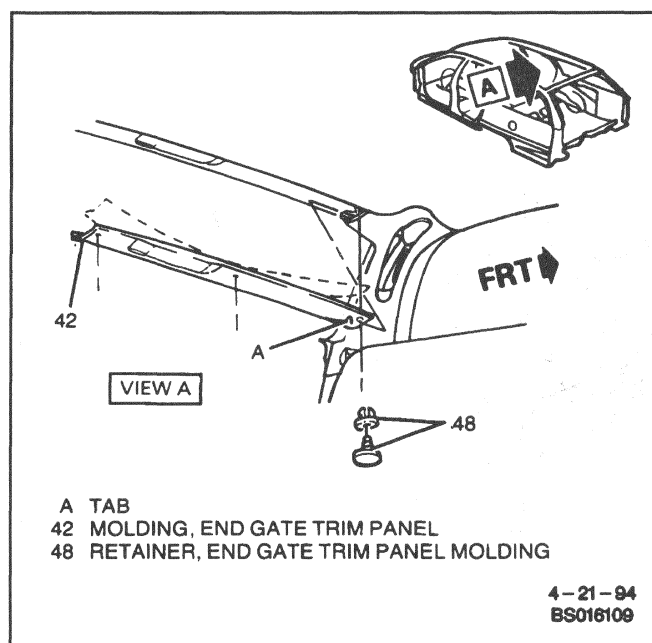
Endgate Trim Panel Molding - (Wagon)
